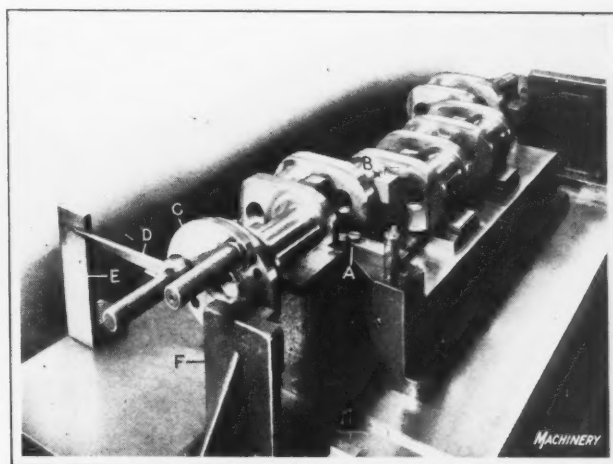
Fixture employed for checking the Plane of the Various Crankpins Relative to the Main Bearings
